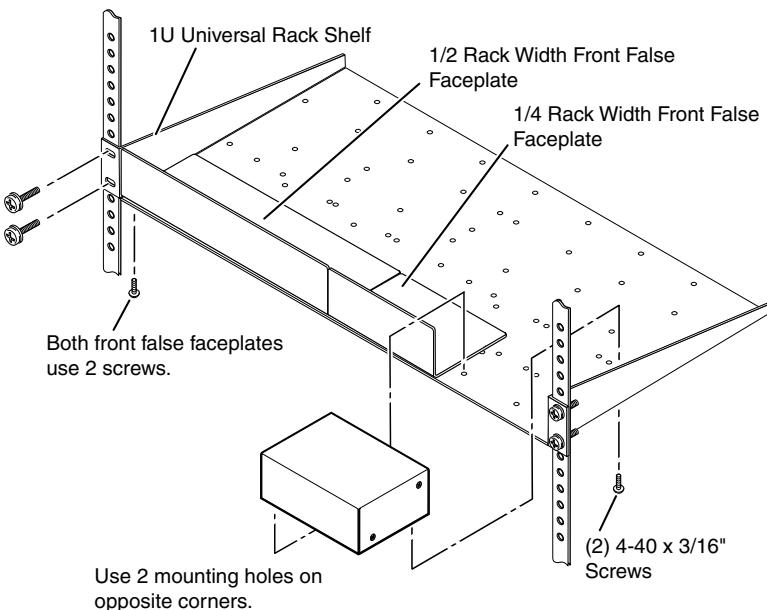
Mounting the DMP 44 LC on a Universal Rack Shelf
